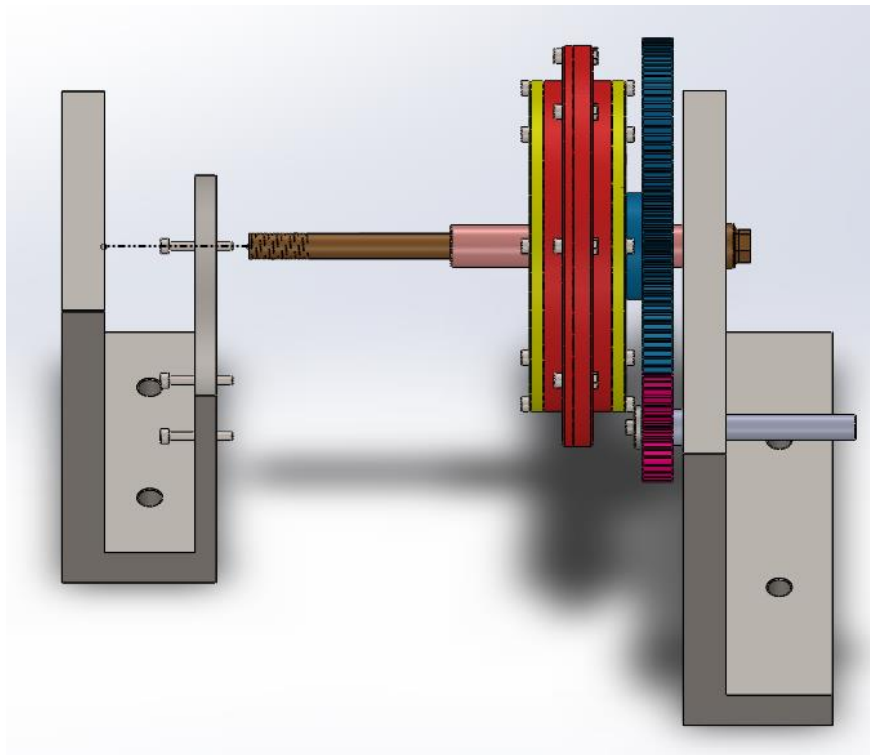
Assembly of driving shaft, driven shaft and second holder
